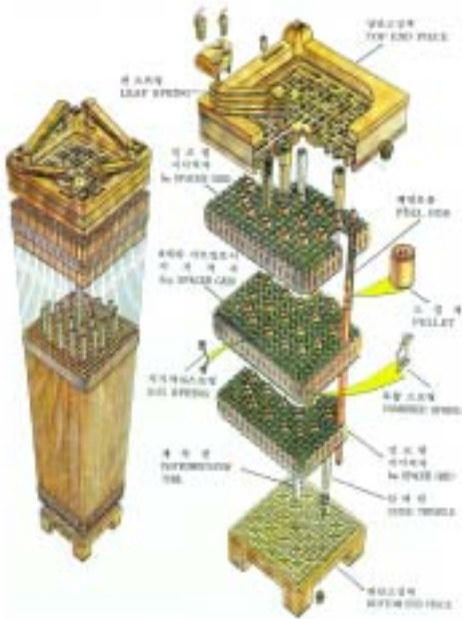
Fuel Assembly for Westinghouse-type Plant.
